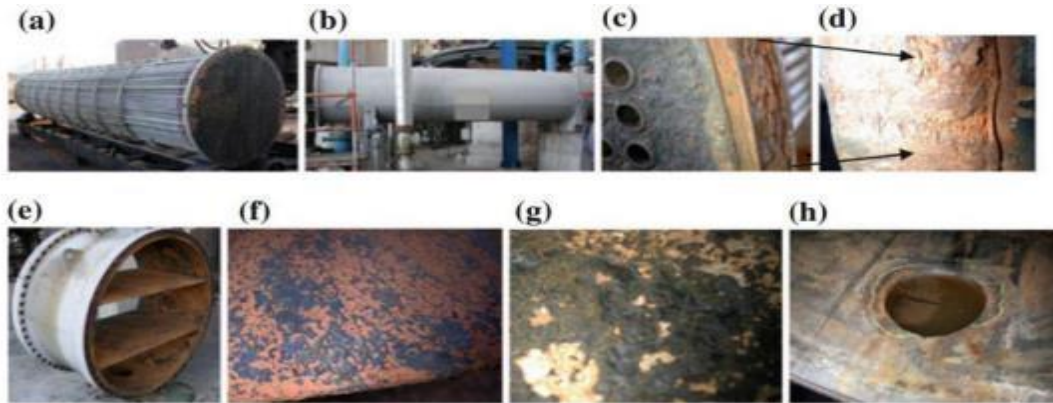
(a) The heat exchanger bundle as a whole (HDS unit). the cortex (b). (c) Corroded tube sheets in close proximity to the stainless steel 316L cap. (D) Enlarge the picture. (e-g) the degraded canal's interior surface (sour water). (h) The shell inlet's rusted inner surface (cooling water)
